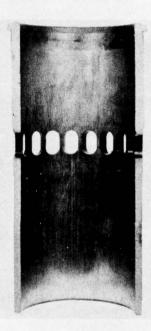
Severe piston and liner scoring, test no. 5, cylinder 2L-thrust side, lubricant code B, ref. no. 2 DF, 121 hours.
